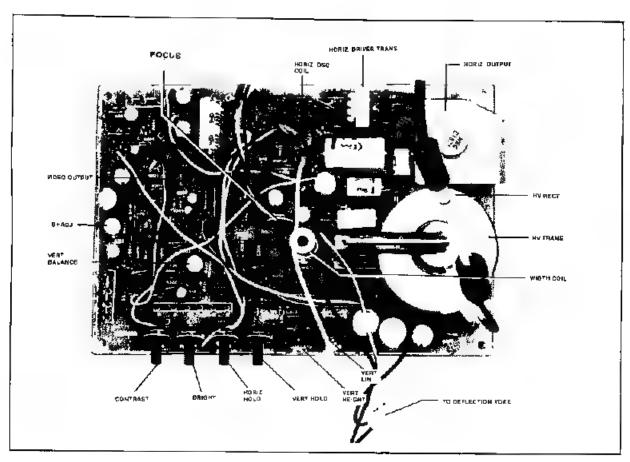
TEC Monitor Printed Circuit Board, Top View
